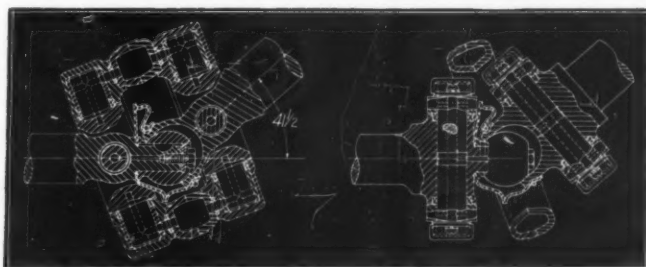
Cord-mechanics universal joint. Ball centering member maintains constant intersection of shaft axes, allowing center ring to float midway
